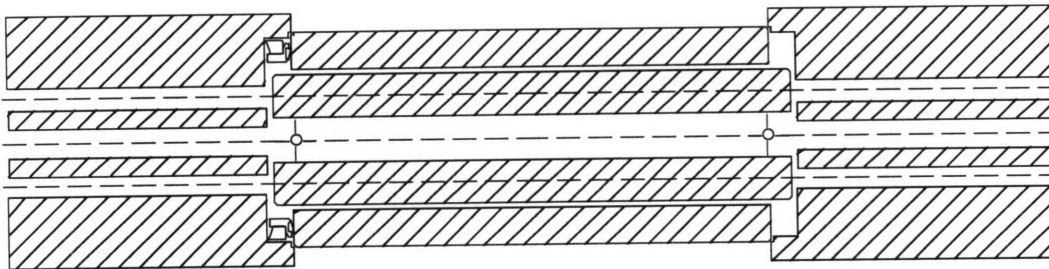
A cross section of the bushing assembly in which the D10 seals are tested. The D10 seal is shown only in the left side of the assembly.
